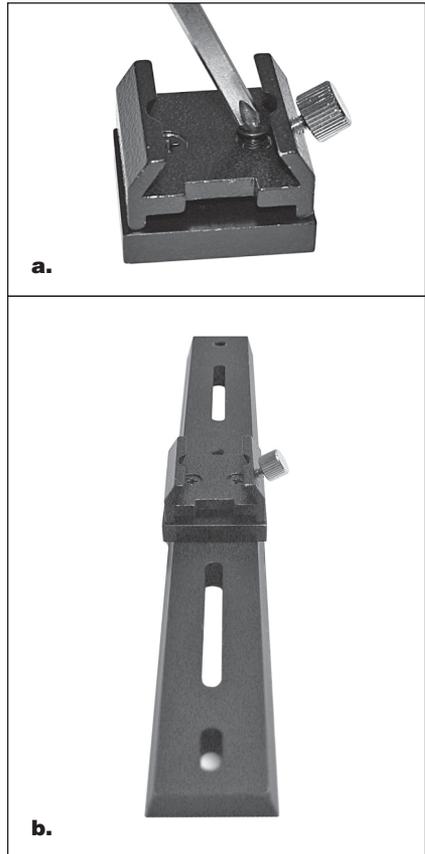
a) The dovetail shoe threads into the adapter plate with two screws.
